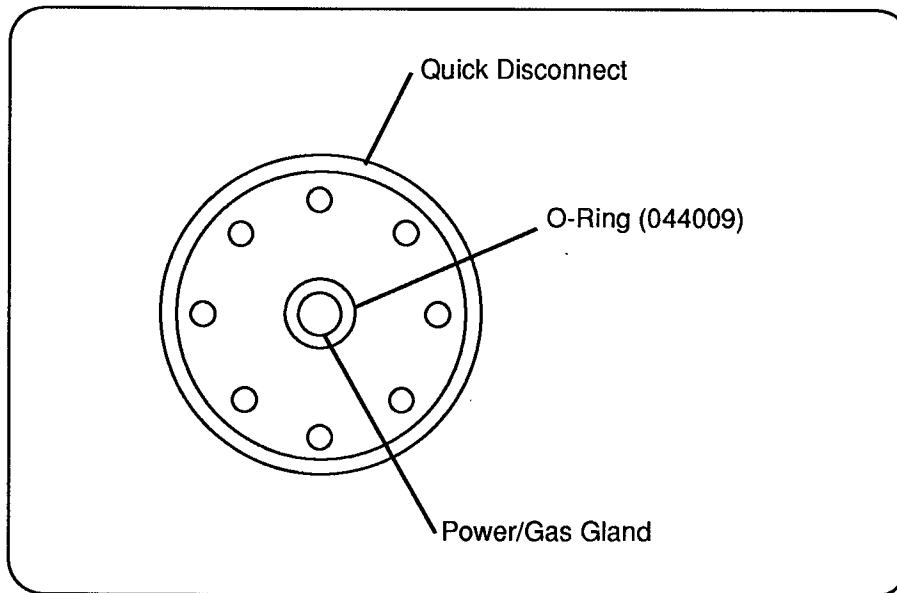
Quick Disconnect O-Ring Removal and Replacement
